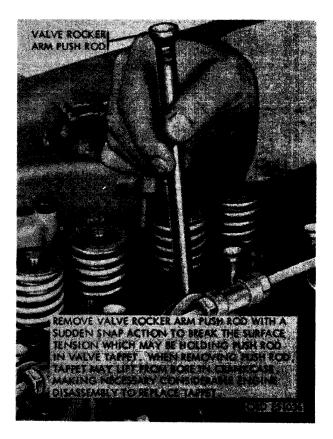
REMOVING OR INSTALLING VALVE ROCKER ARM PUSH ROD.
